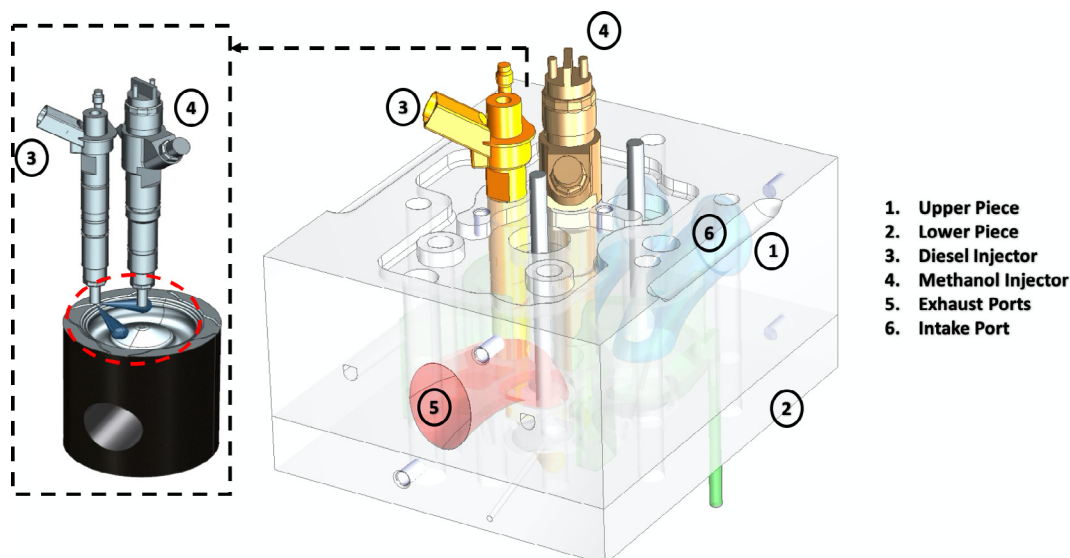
Two-injector, Three-valve Cylinder Head Design.
